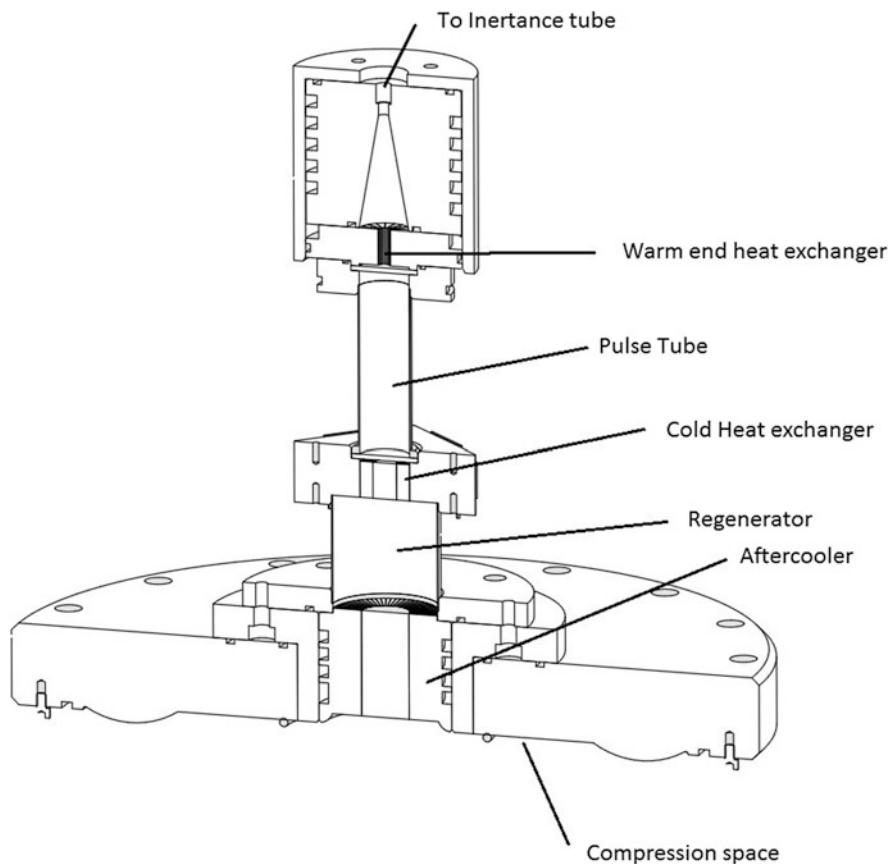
The in-line pulse tube mounted on the dWPG top plate [6]
